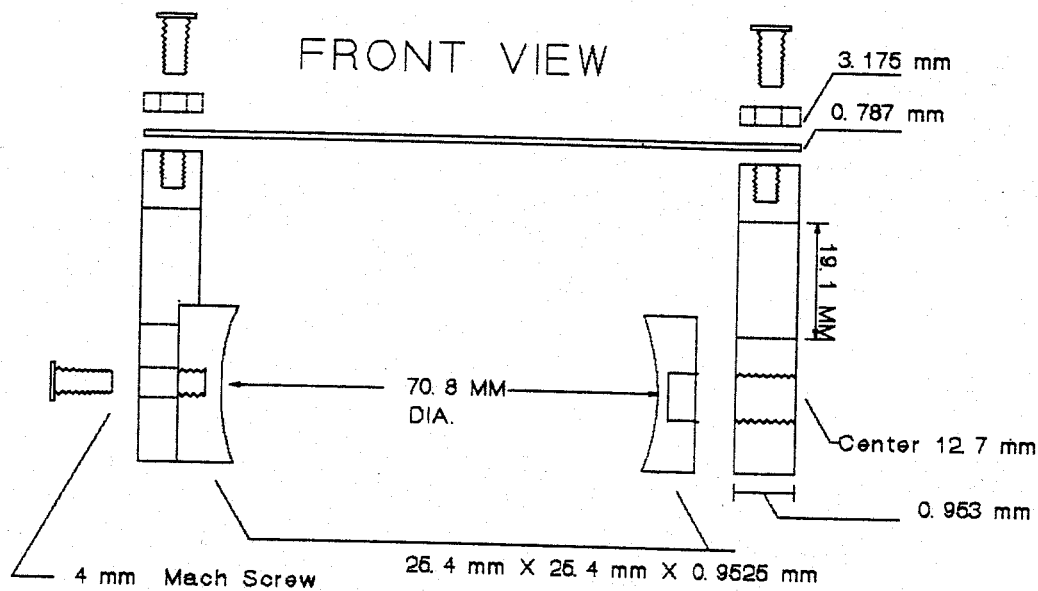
Dimensions of the metallic pieces of the DEX70 dendrometer.
